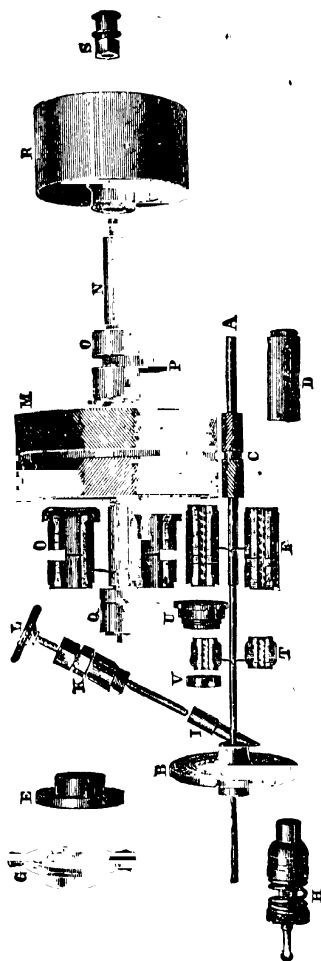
DETAILS OF TURBINE WHEEL, FLEXIBLE SHAFT, BEARINGS, AND GEARING FOR THE DE LAVAL STEAM TURBINE.
